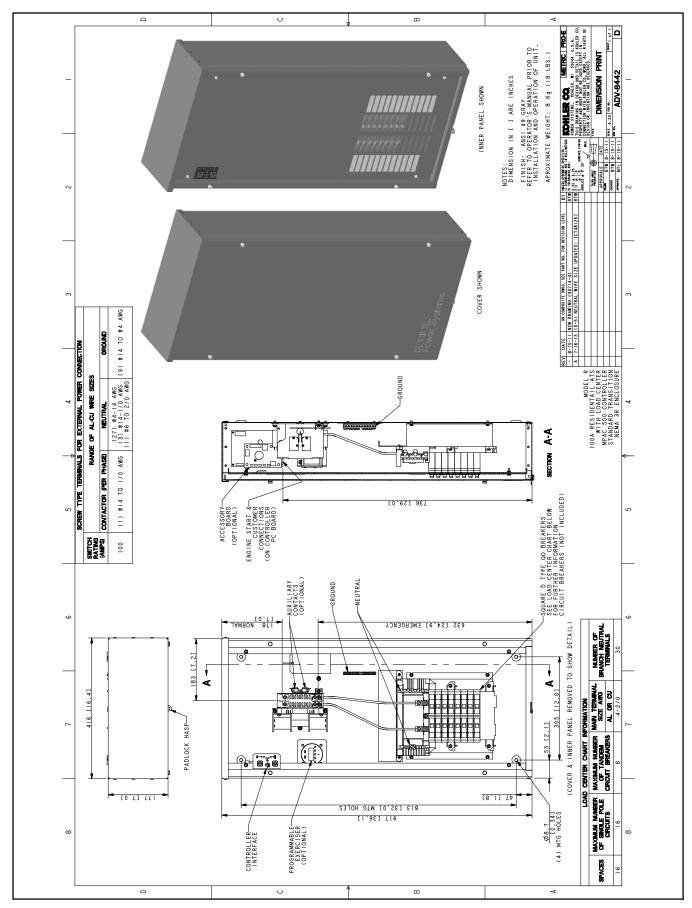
Dimension Drawing, 100 Amp NEMA Type 3R Enclosure with Load Center, ADV-8442
